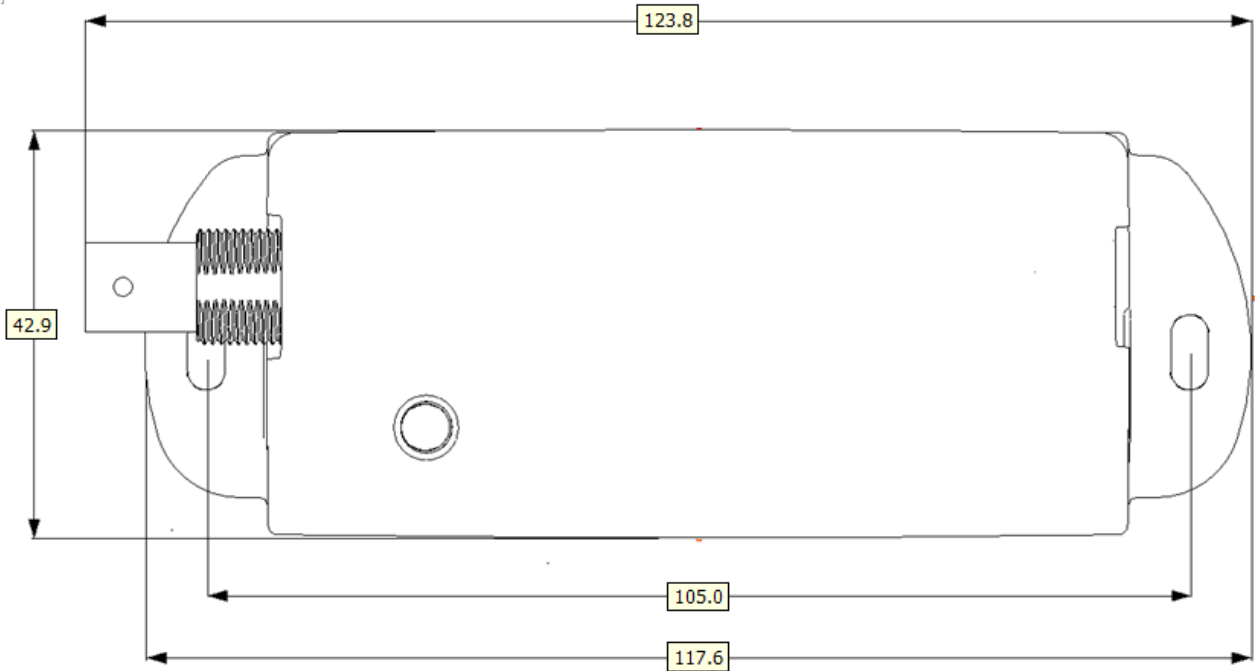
LDSBus ORP Sensor Adapter Dimension – Top View
